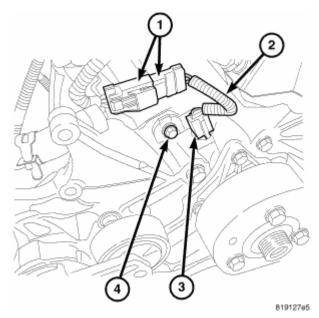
Camshaft Position Sensor 3.8L Courtesy of CHRYSLER LLC
